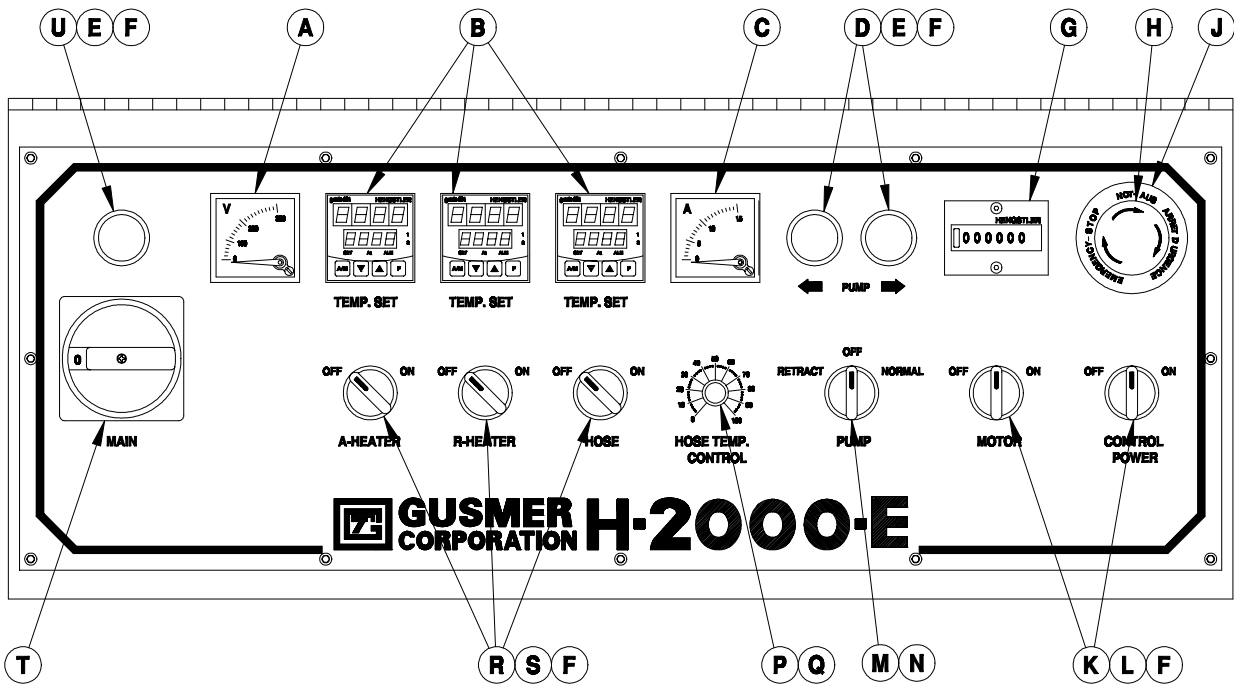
Electrical Console (Part No. 030-00006-001), Sheet 1 of 2
